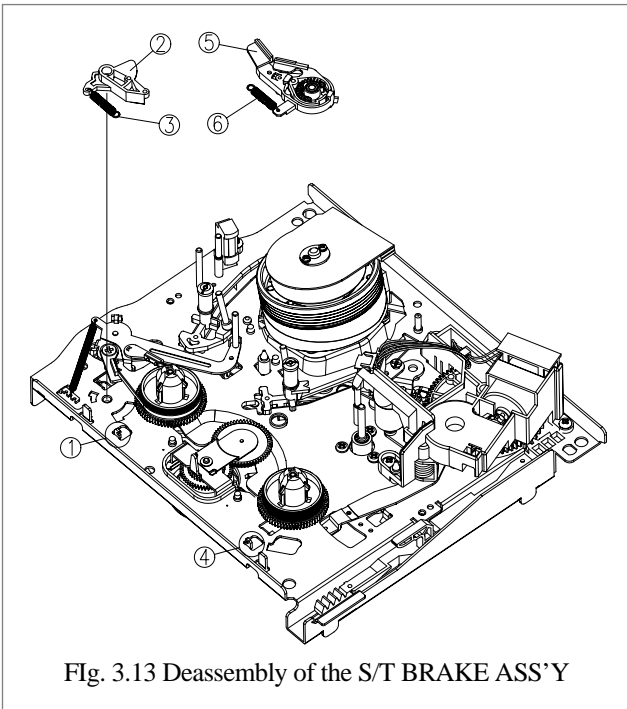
Deassembly of the S/T BRAKE ASS'Y
